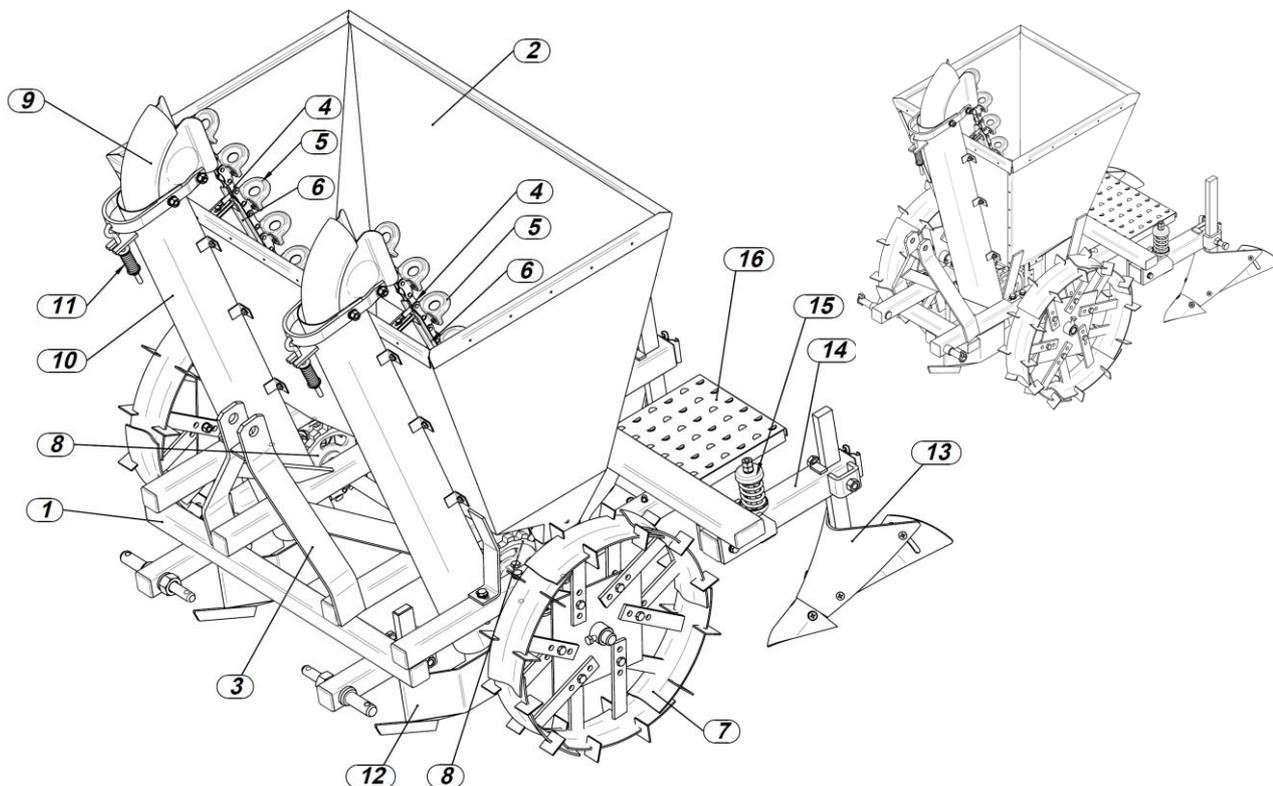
Basic units of S239 automatic conveyor planter: 1 - frame, 2 - tank, 3 - three-point suspension system, 4 - chain conveyor, 5 - bucket, 6 - chain guide, 7 - road wheel with spurs, 8 - drive sprockets, 9 - head of the chute pipe, 10 - chute pipe, 11 - chain tensioner, 12 - marker, 13 - ridging coulter, 14 - ridger lever, 15 - platform
